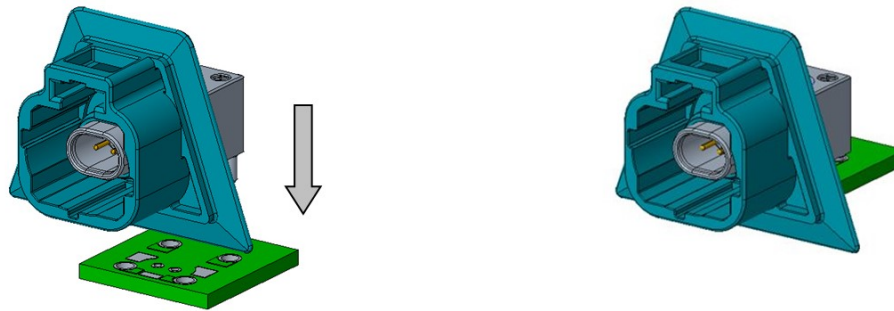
/ Pin Header 1P 90° sealed, TE-No. 2397320
